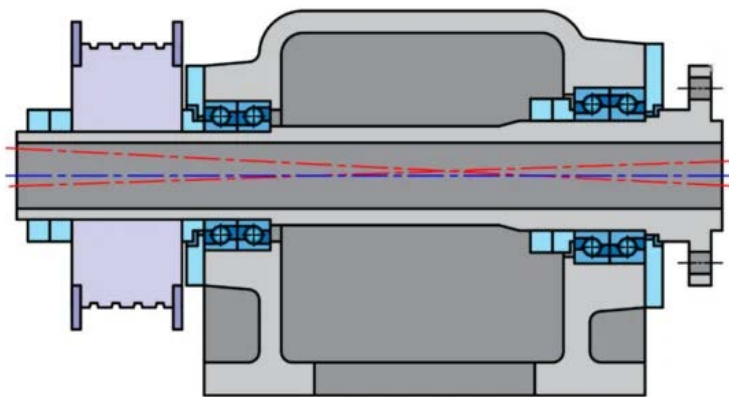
An exemplary schematic drawing of a CNC lathe spindle assembly [8]
